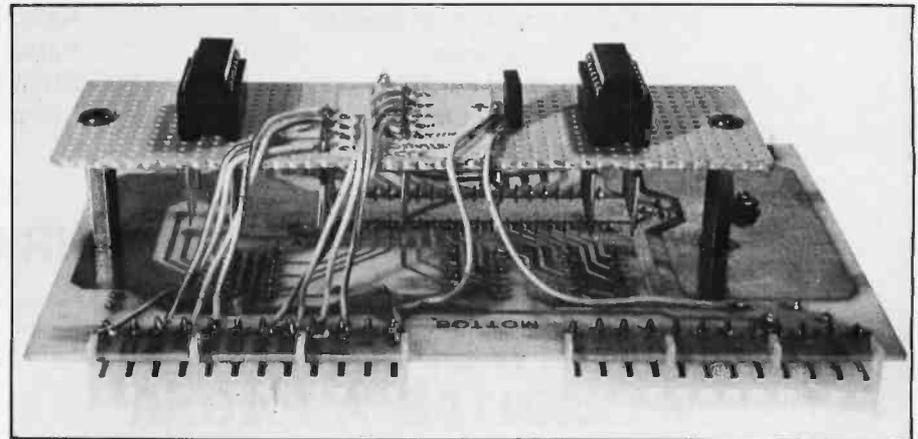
Shown here is the method of mounting the cycle-counter circuit board.
